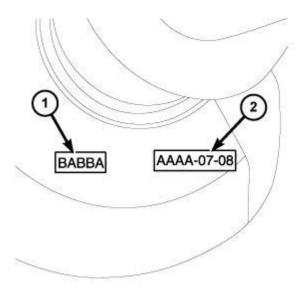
CRANKSHAFT BEARING SIZE MARK Courtesy of CHRYSLER LLC
